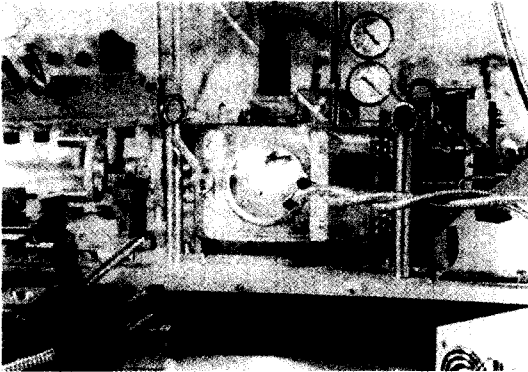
Photograph of the Welding Chamber with an Optical Coupler
